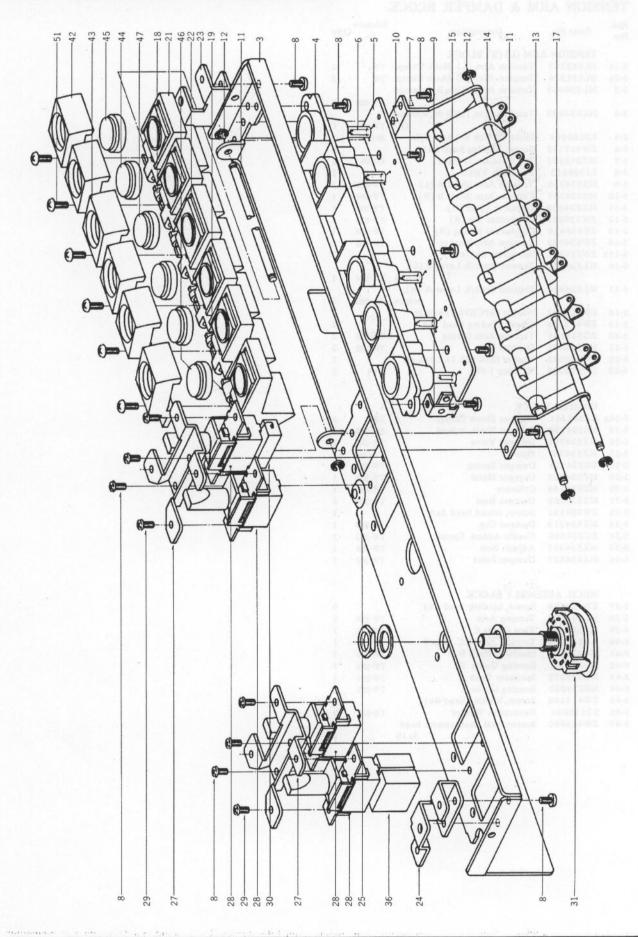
ILLUSTRATION OF TENSION ARM & DAMPER BLOCK
